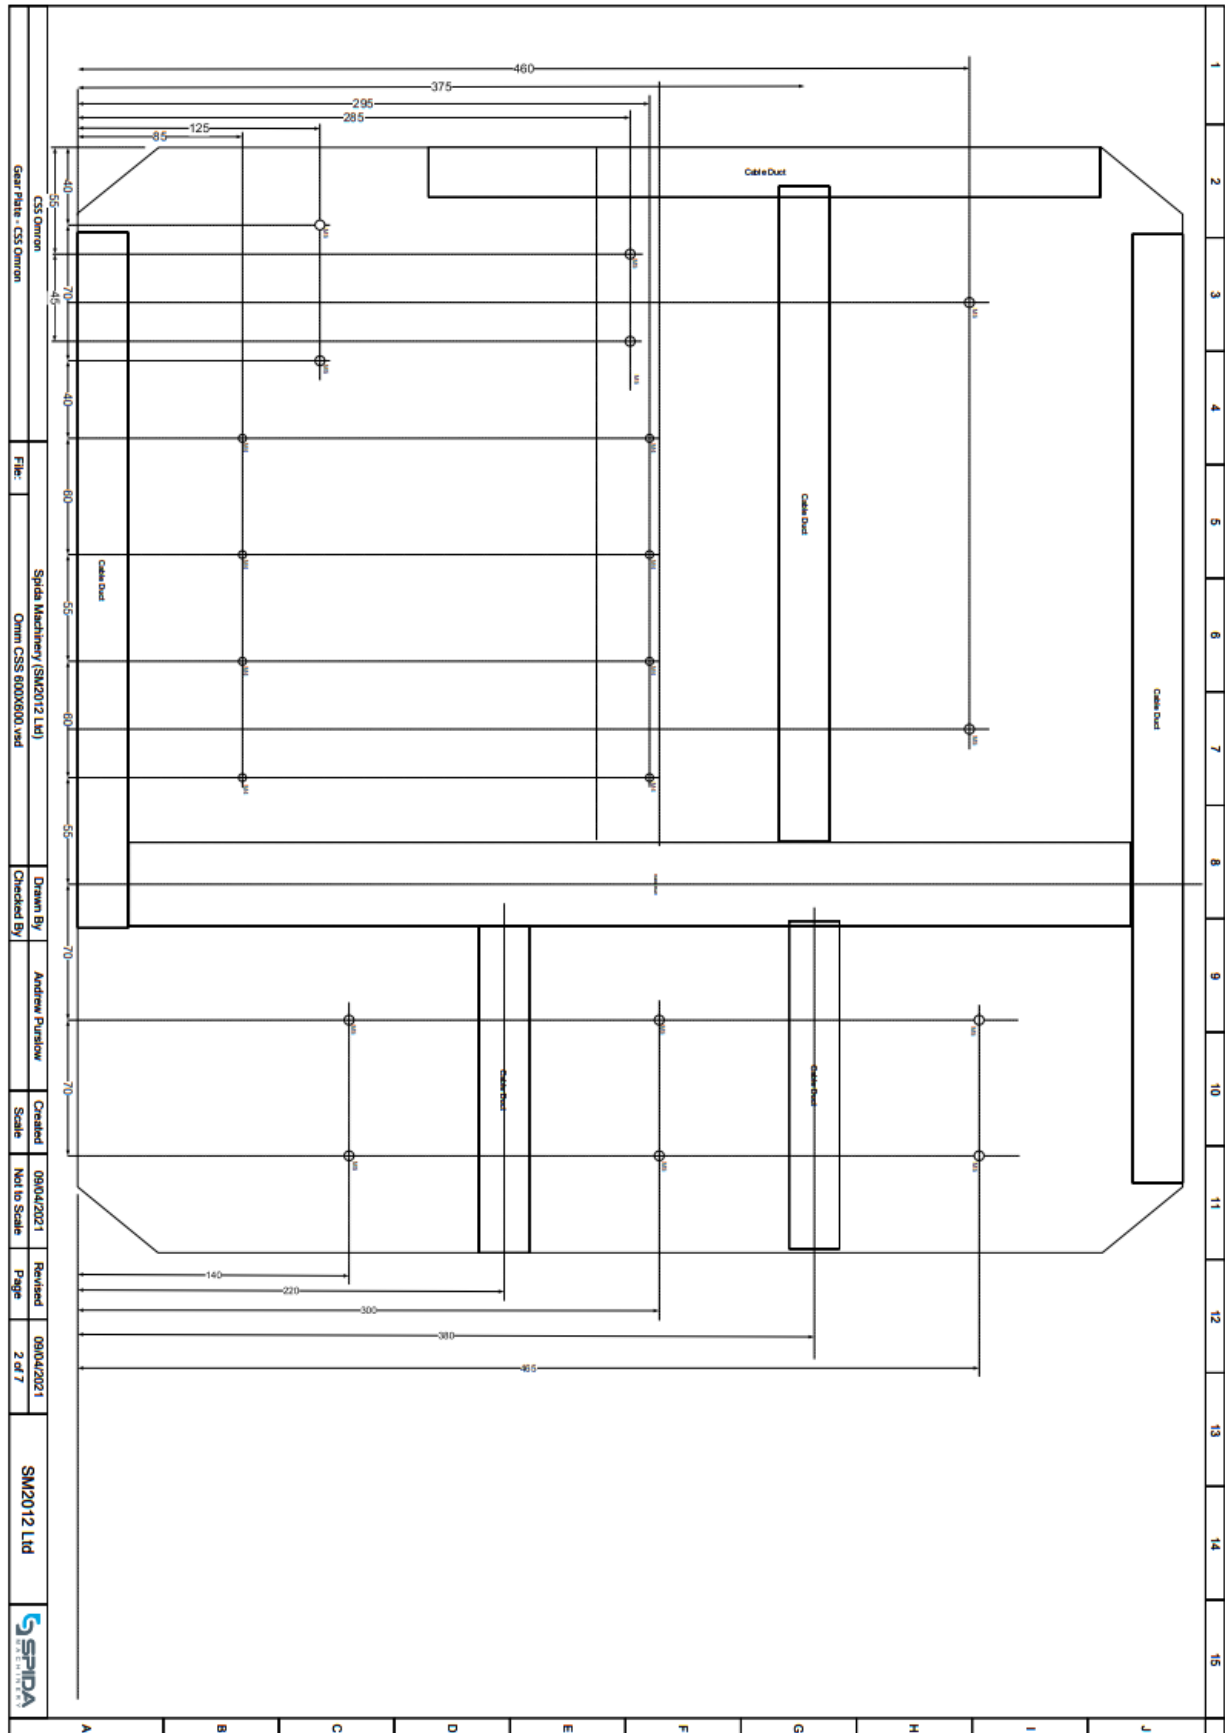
, Apollo Electrical Drawings NZ/AU part 2
